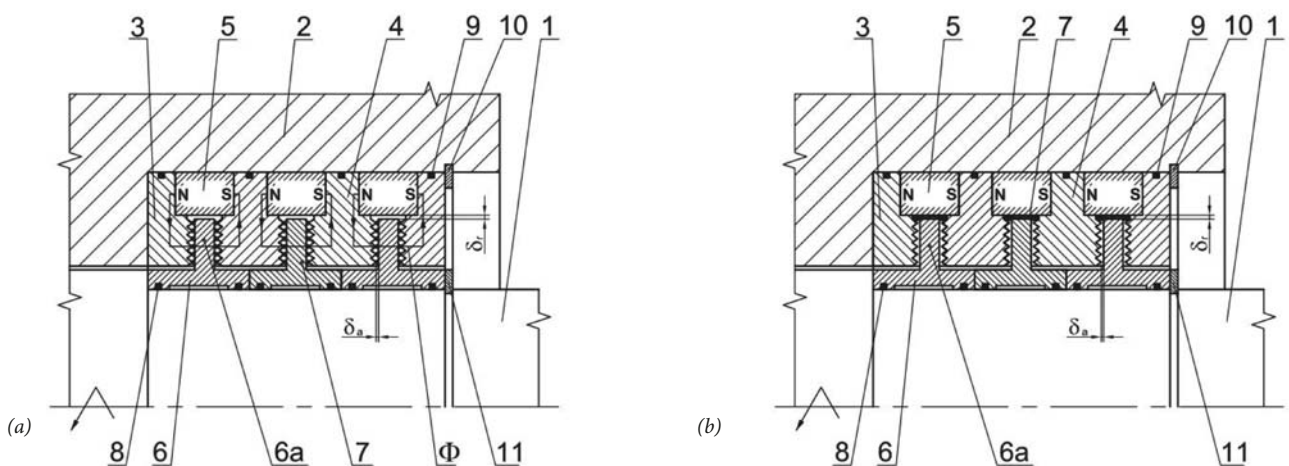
Multi-staged ferromagnetic seal for rotating shaft (a) position of magnetic fluid at low rotating speed, (b) position of magnetic fluid at high rotating speed, 1 – shaft, 2 – housing, 3, 4 – multi-edged pole pieces, 5 – permanent magnet, 6 – flanged sleeve, 6a – flange, 7 – ferromagnetic fluid, 8, 9 – “O” – ring seals, 10, 11 – snap rings, δ_a – axial sealing gap, δ_r – radial sealing gap, Φ – closed magnetic circuit
